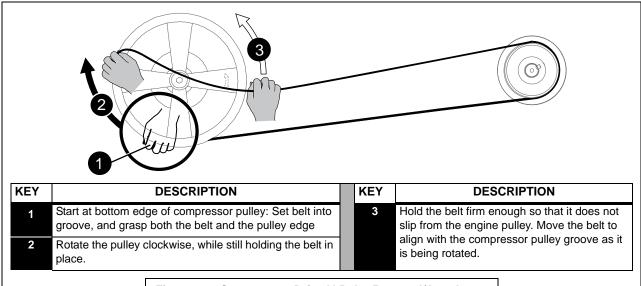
Compressor Drive V-Belt - Removal/Attachment
